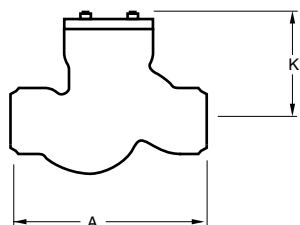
WE* Butt Weld Ends
